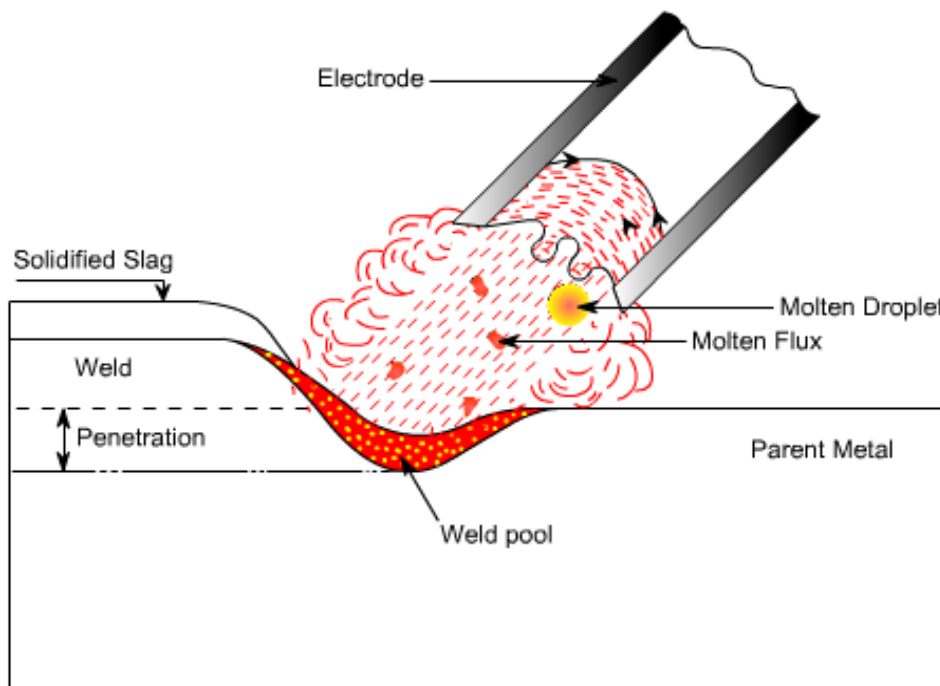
Molten Metal and Flux Transfer to Weld Pool
